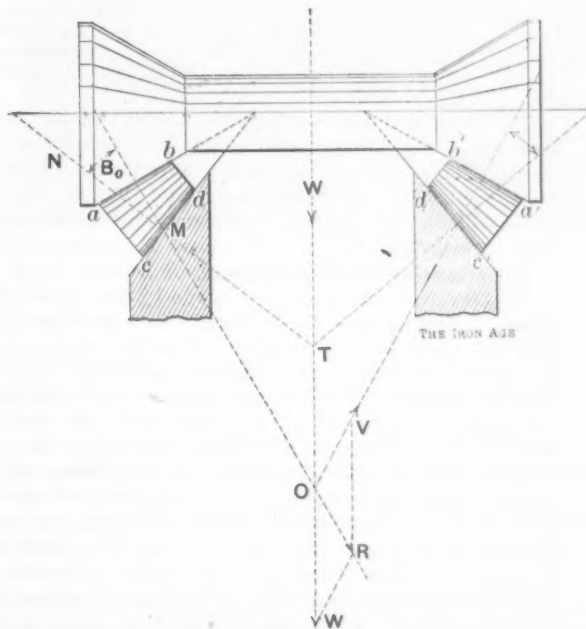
Both Ends of Shaft Supported on Conical Rollers.
